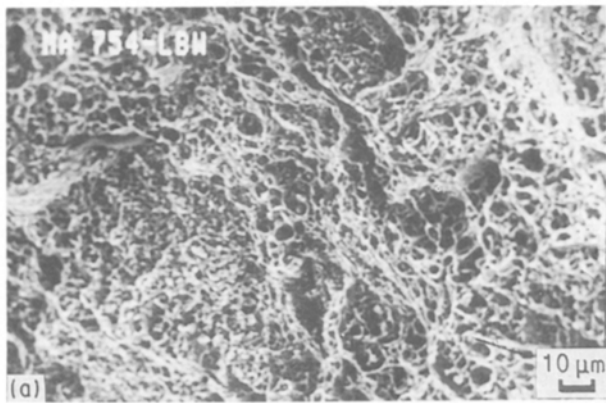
Scanning electron fractographs showing the fracture appearance of laser-welded MA 754 alloy.
